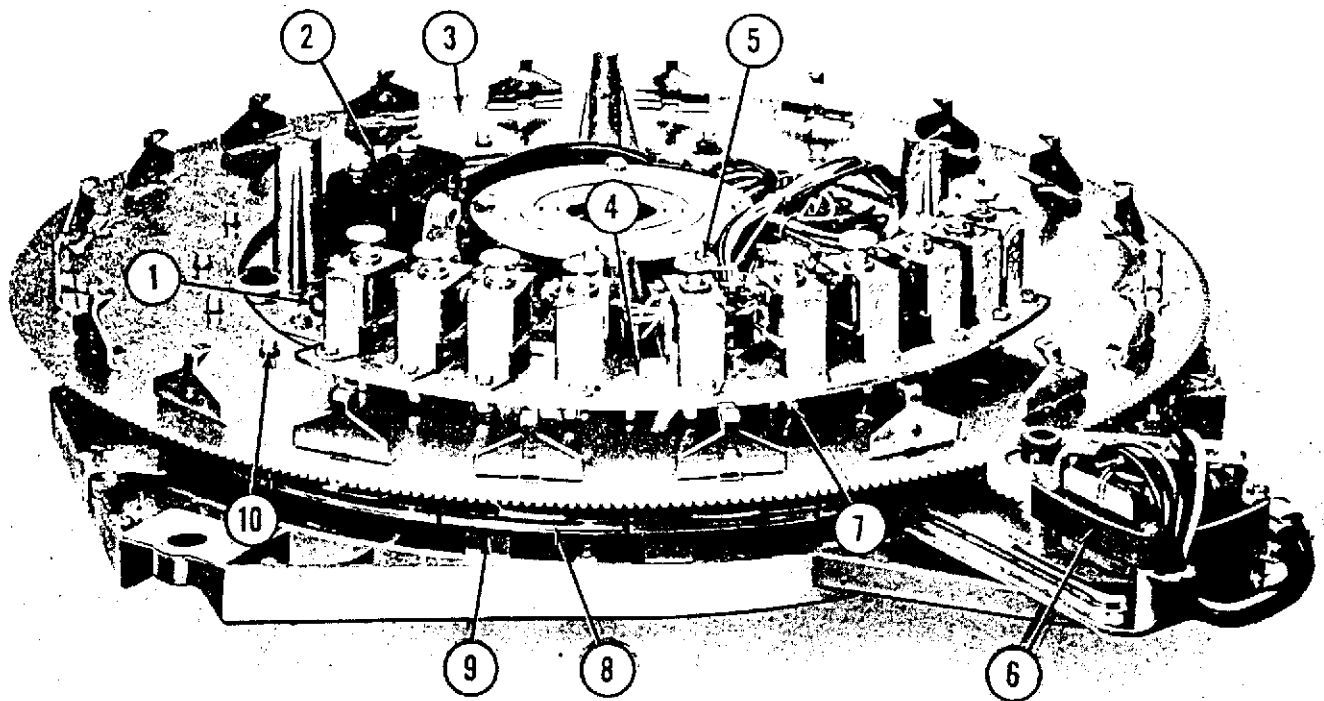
ELECTRIC SELECTOR, SELECTION COMPONENTS
